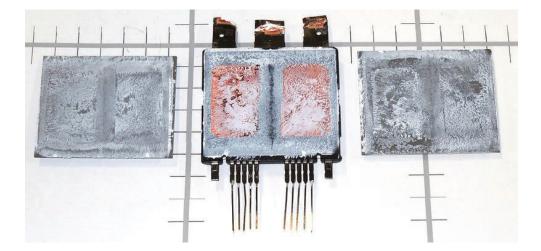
Toyota Inverter: IGBTs Assembled to IGBT Cooler
